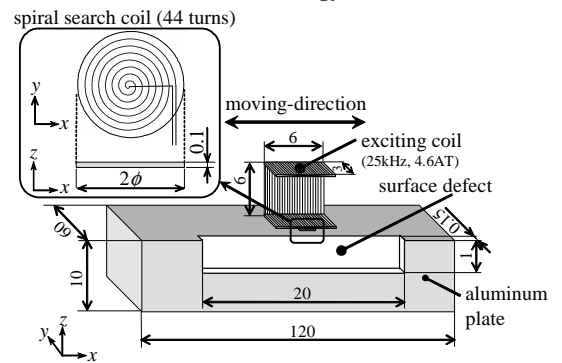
Inspection model for surface defect on aluminum plate (1/2domain).
